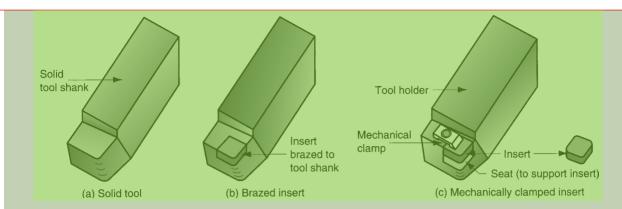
Three ways of holding and presenting the cutting edge for a single-point tool: (a) solid tool, typical of HSS; (b) brazed insert, one way of holding a cemented carbide insert; and (c) mechanically clamped insert, used for cemented carbides, ceramics, and other very hard tool materials.
